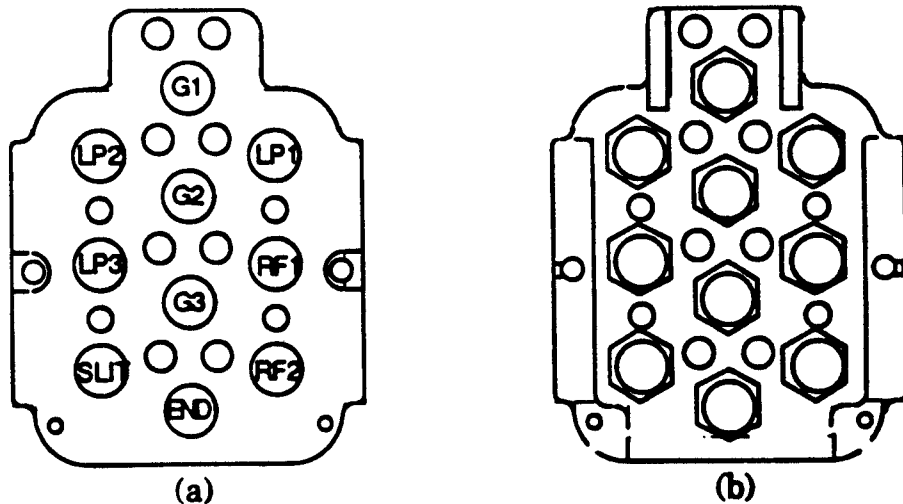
Patch Panel Views (1:1 Scale) - (a) Top Side (b) Under Side
